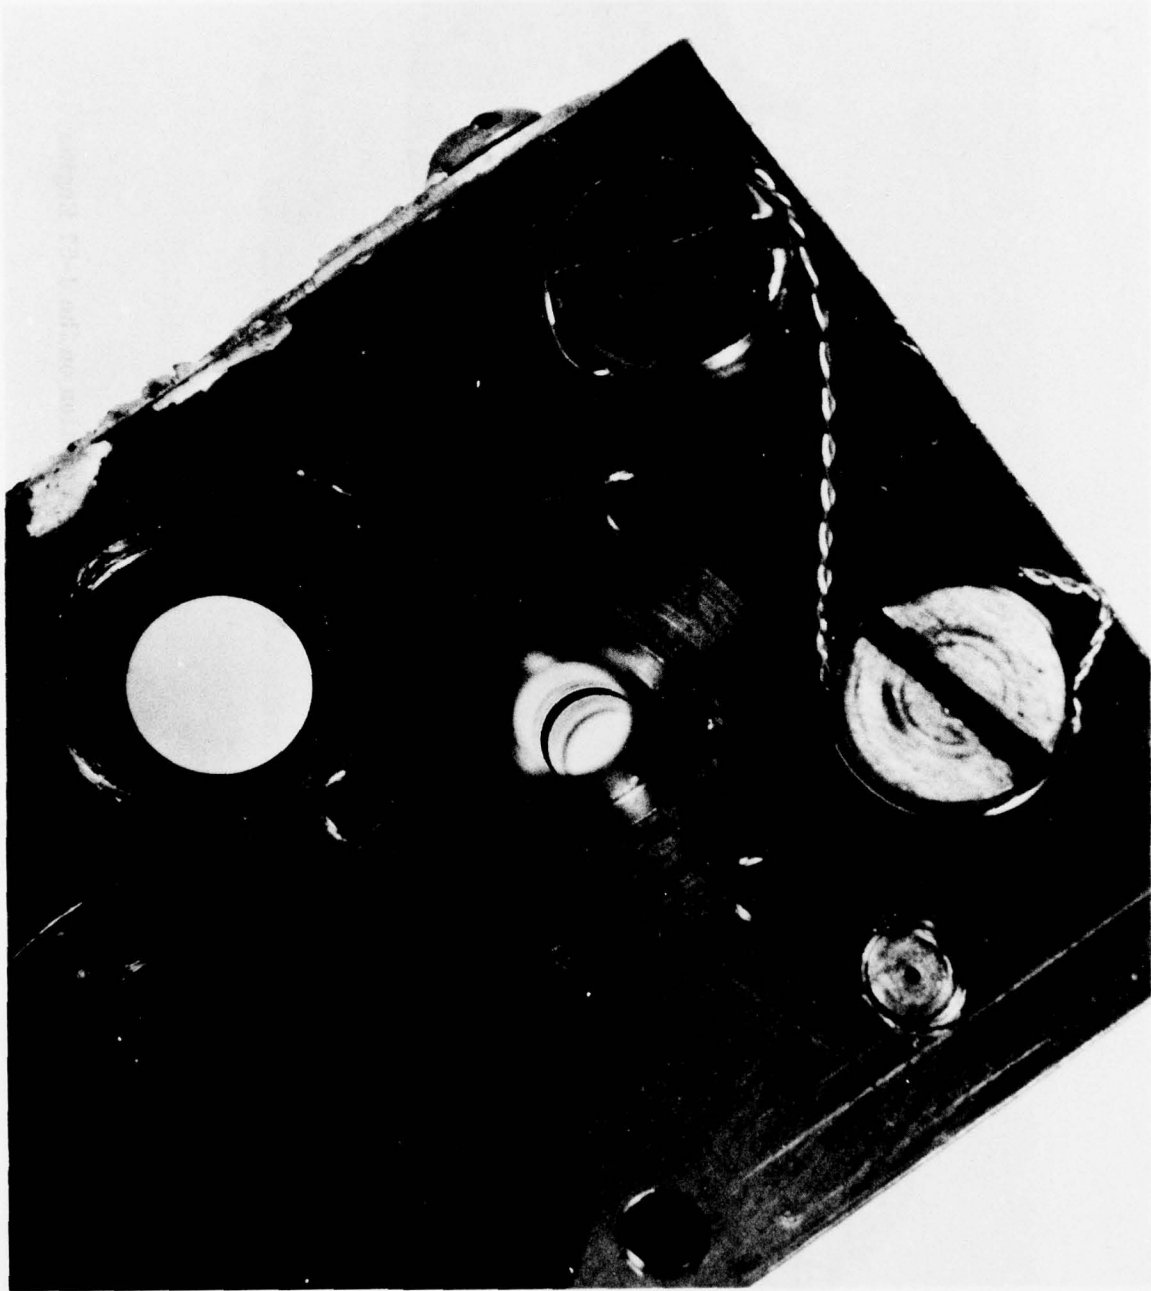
The Piston Sleeve Bore after Operation on the J-57 Engine
